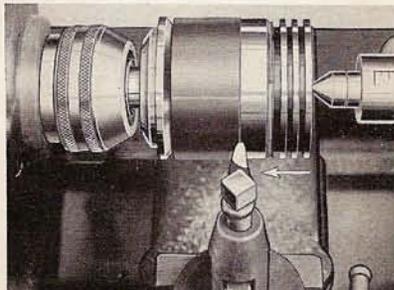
Finishing a Semi-Machined Cast Iron Piston Mounted on the Piston Adapter.
